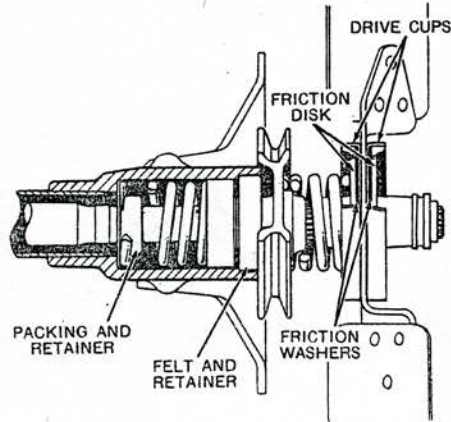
B Cutaway view of Model 60 fan assembly. Model 50 is similar
